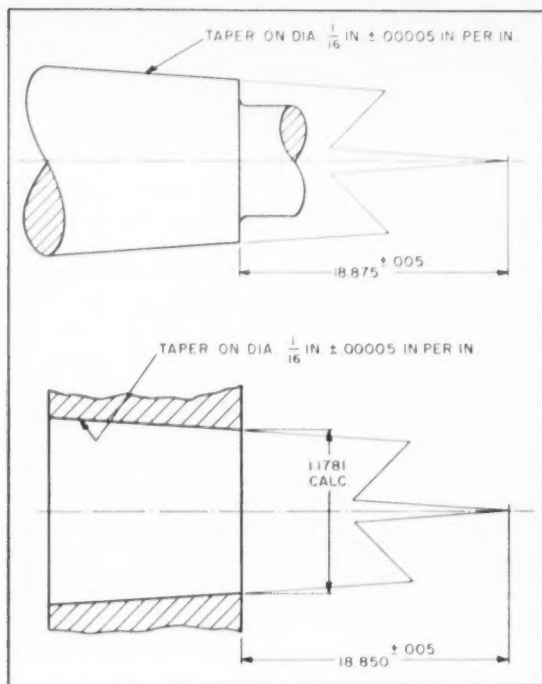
Tapers may also be dimensioned by using a gage diameter of zero, or the apex of the cone of the taper.
